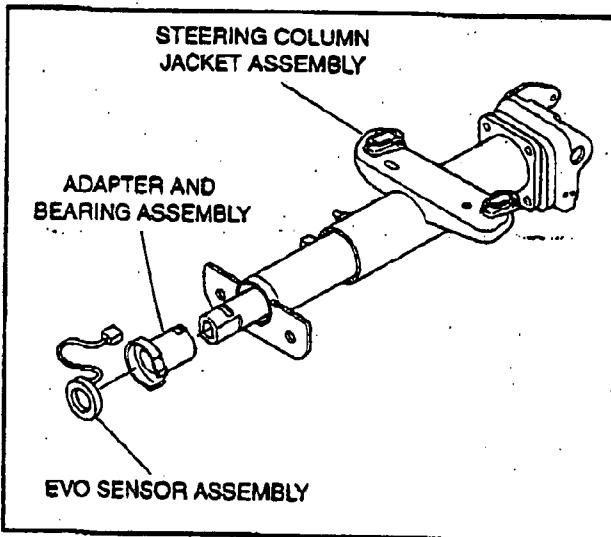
Removing Bearing Assembly and Sensor from Steering Column.
